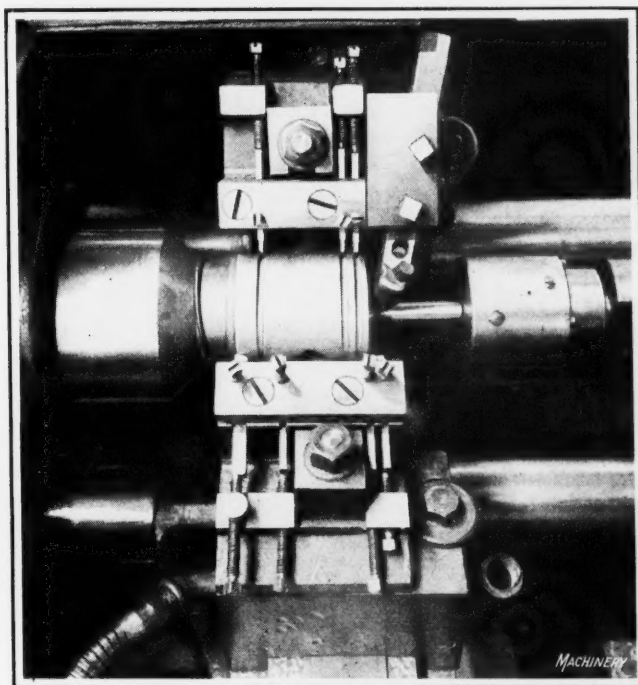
Machine provided with the Tooling Equipment illustrated in Fig. 9
